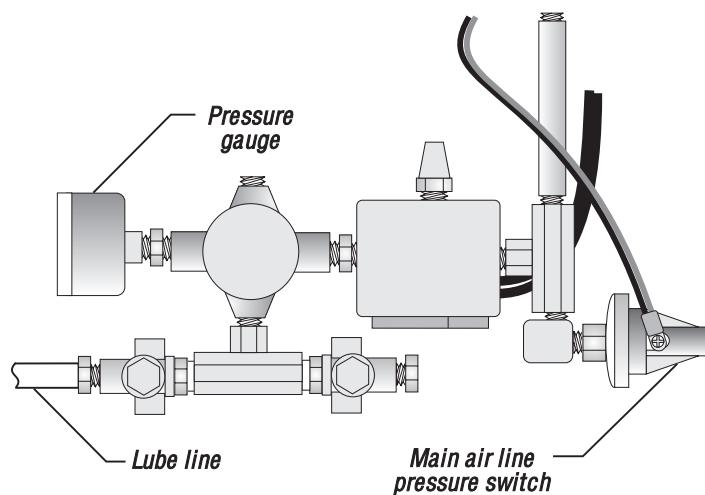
Top view of spindle lube/air solenoid assembly.
